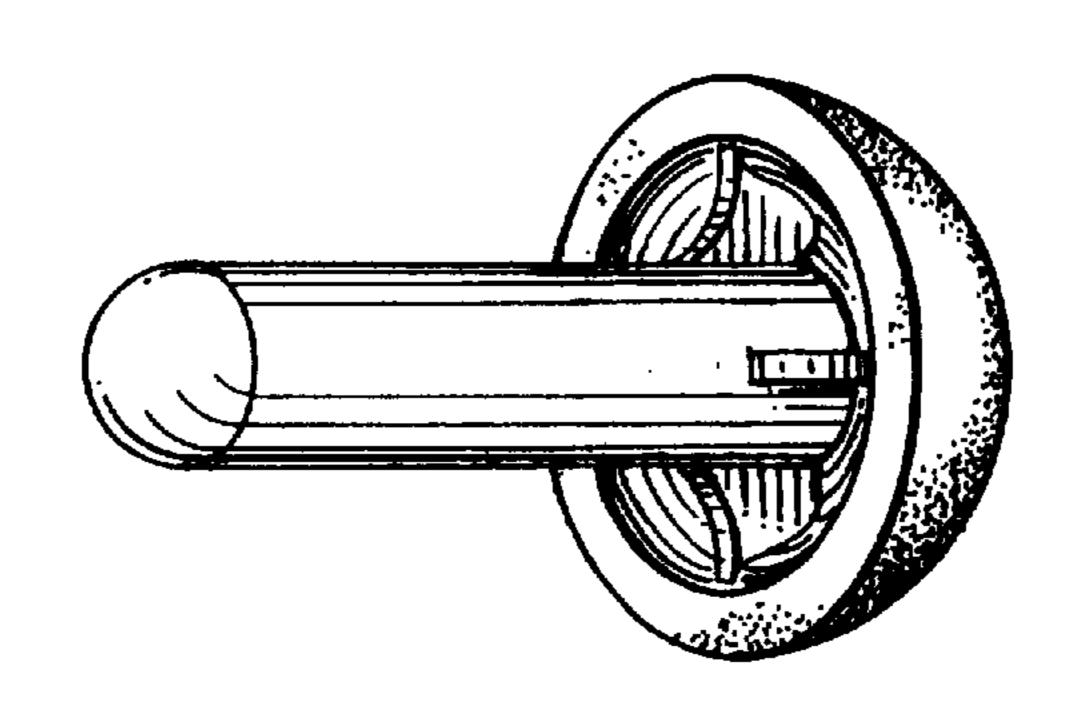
is a rear perspective view of a fourth embodiment of the hearing protection device;
